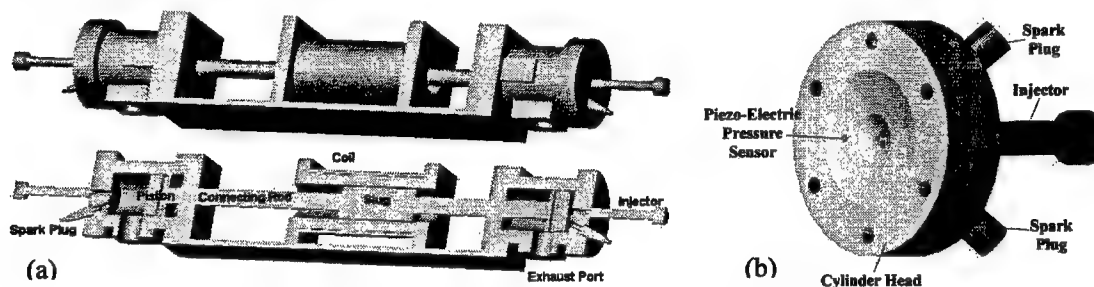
(a) Prototype engine design and (b) detailed view of the cylinder head.
